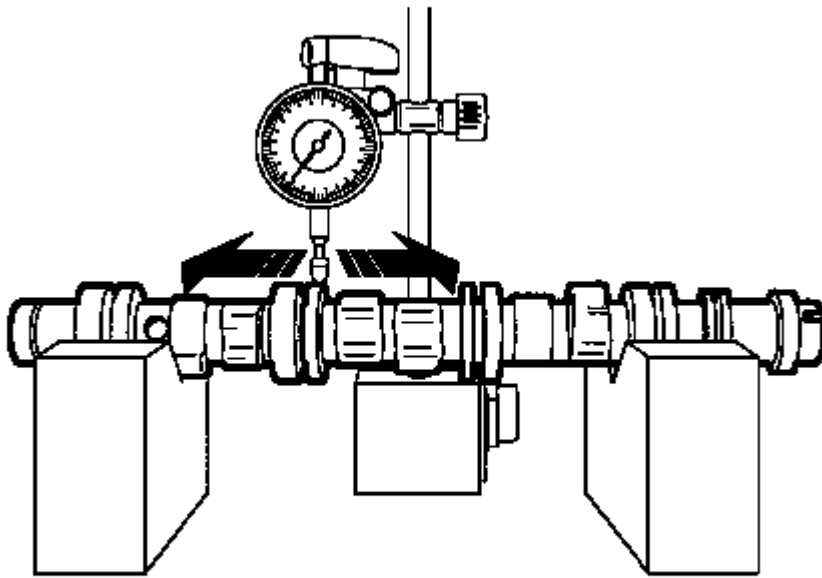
Measuring Excessive Camshaft Runout Using Indicator
